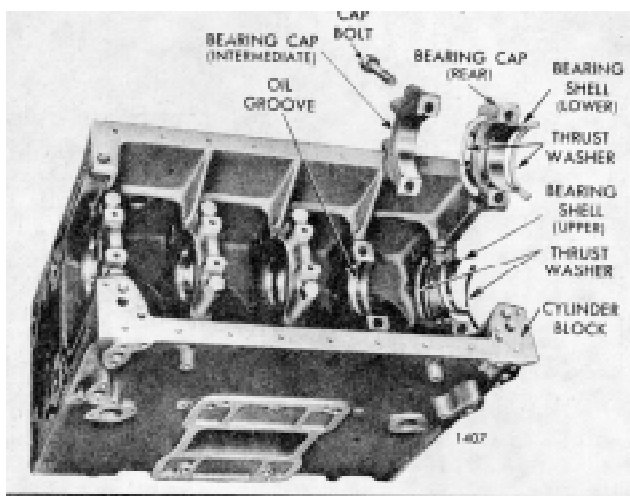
Main Bearing Shells, Bearing Caps and Crankshaft Thrust Washers
